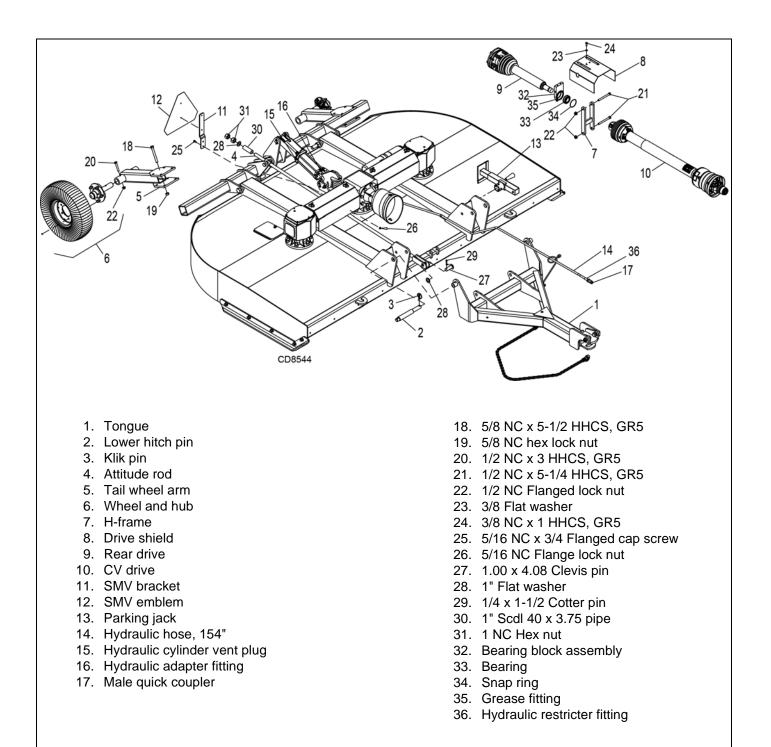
DS8.50 & DS10.50 Pull-Type Cutter Assembly
